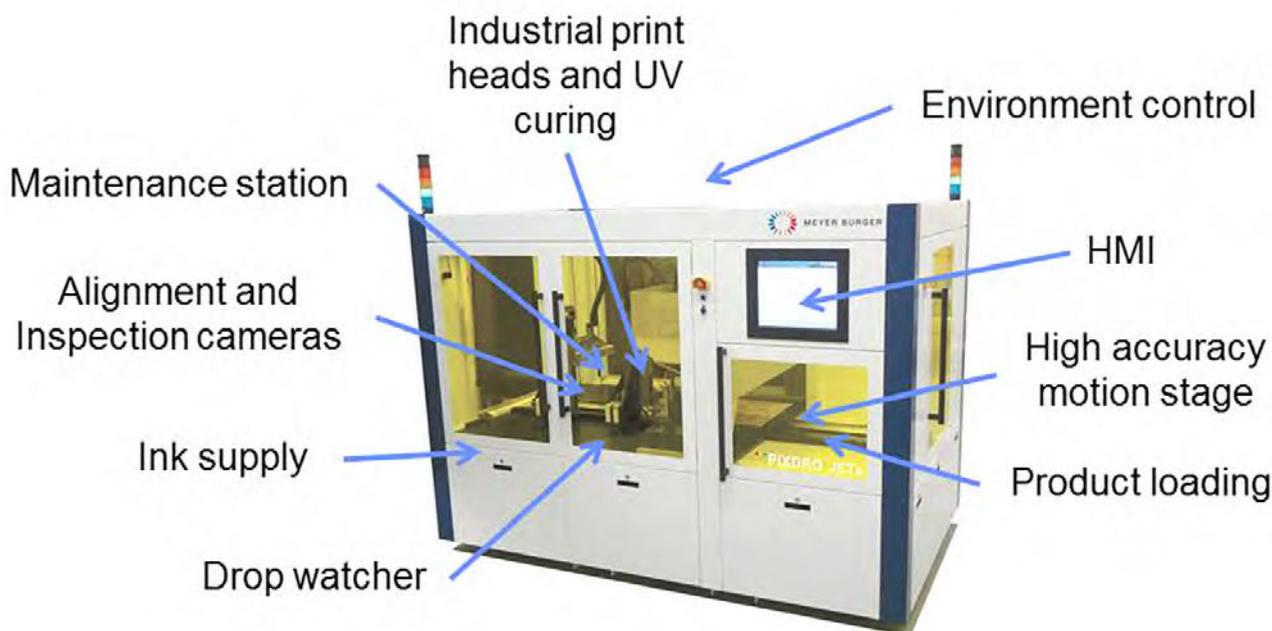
Meyer Burger JETx solder mask PCB production system with various components indicated.
